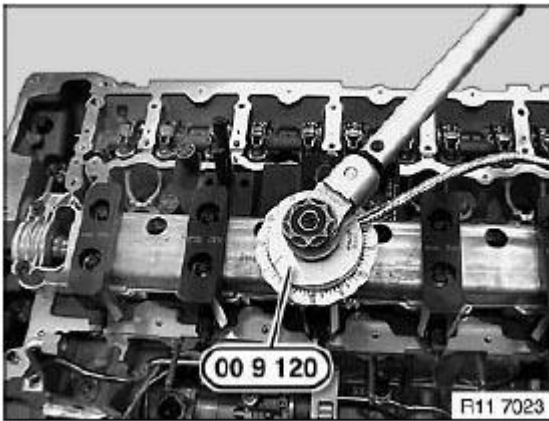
Tightening Lower And Upper Bearing Strips Using Special Tool 00 9 120
